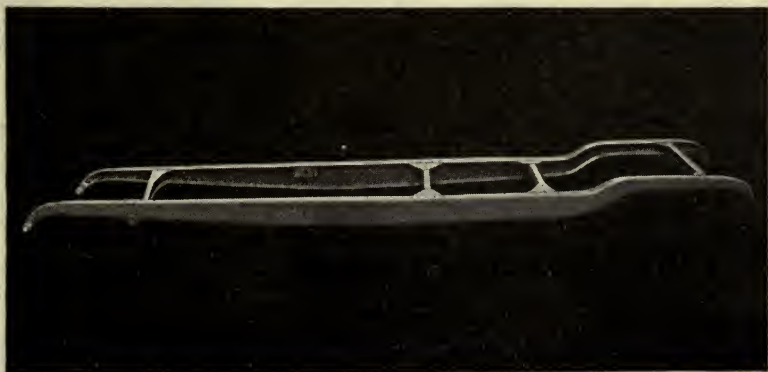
Buick Hydraulic Pressed Steel Frame.
